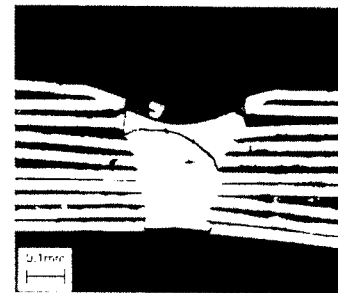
Welding bead cross section (10-foils, Foc=-1.07 mm,  $E = 6.6 \times 10^5$  W/cm<sup>2</sup>)
